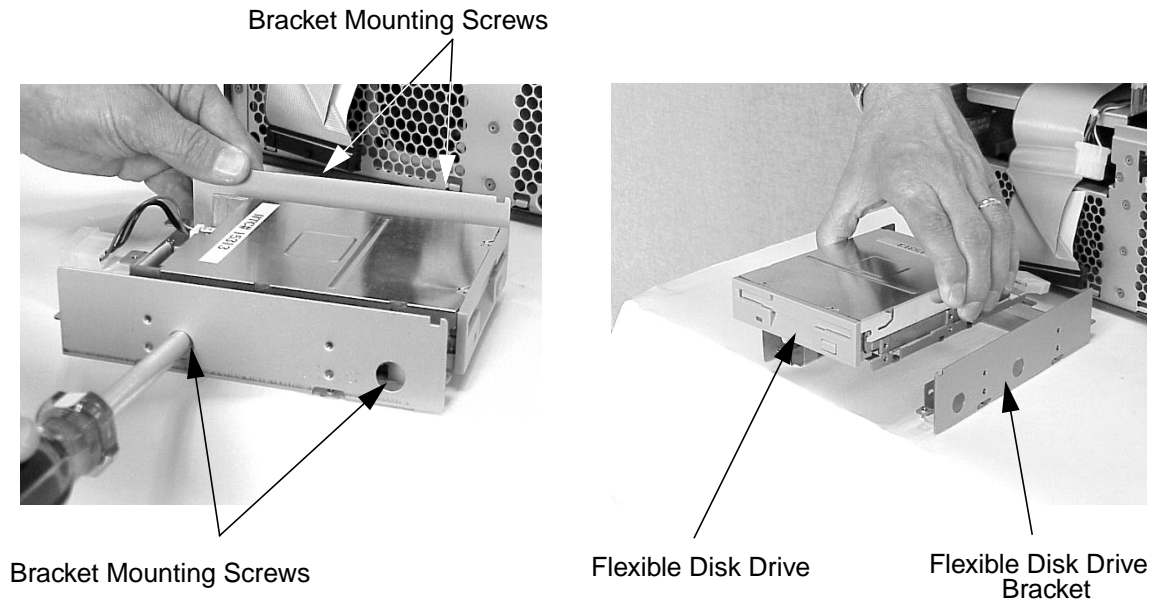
Unscrewing the Flexible Disk Drive's Bezel Mounting Screws
